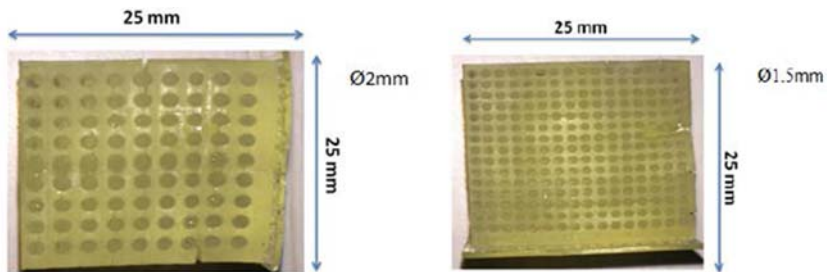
3D printed (A) 2 mm and (B) 1.5 mm pore size model.
